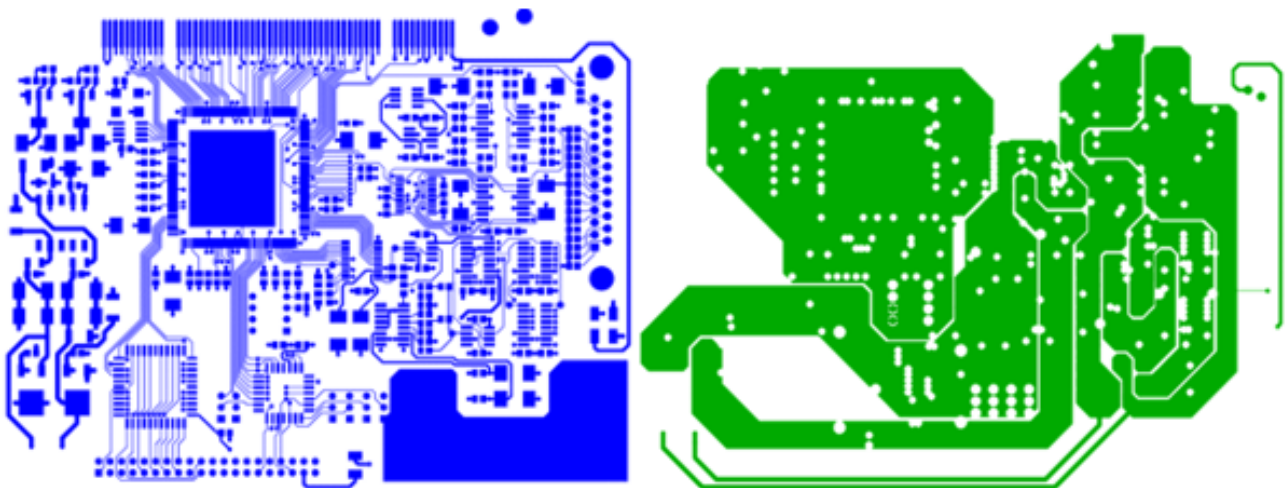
is the blueprint of the Bottom Outer (left) and Bottom Inner (right) Copper Layers
